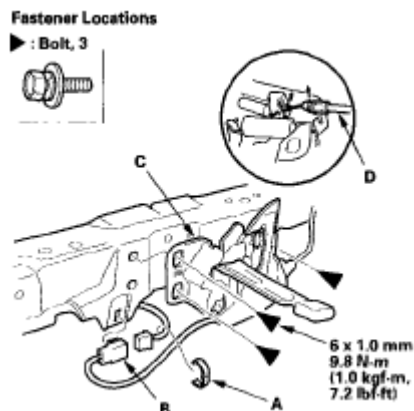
Identifying Hood Latch Switch Connector (With Torque Specifications)
